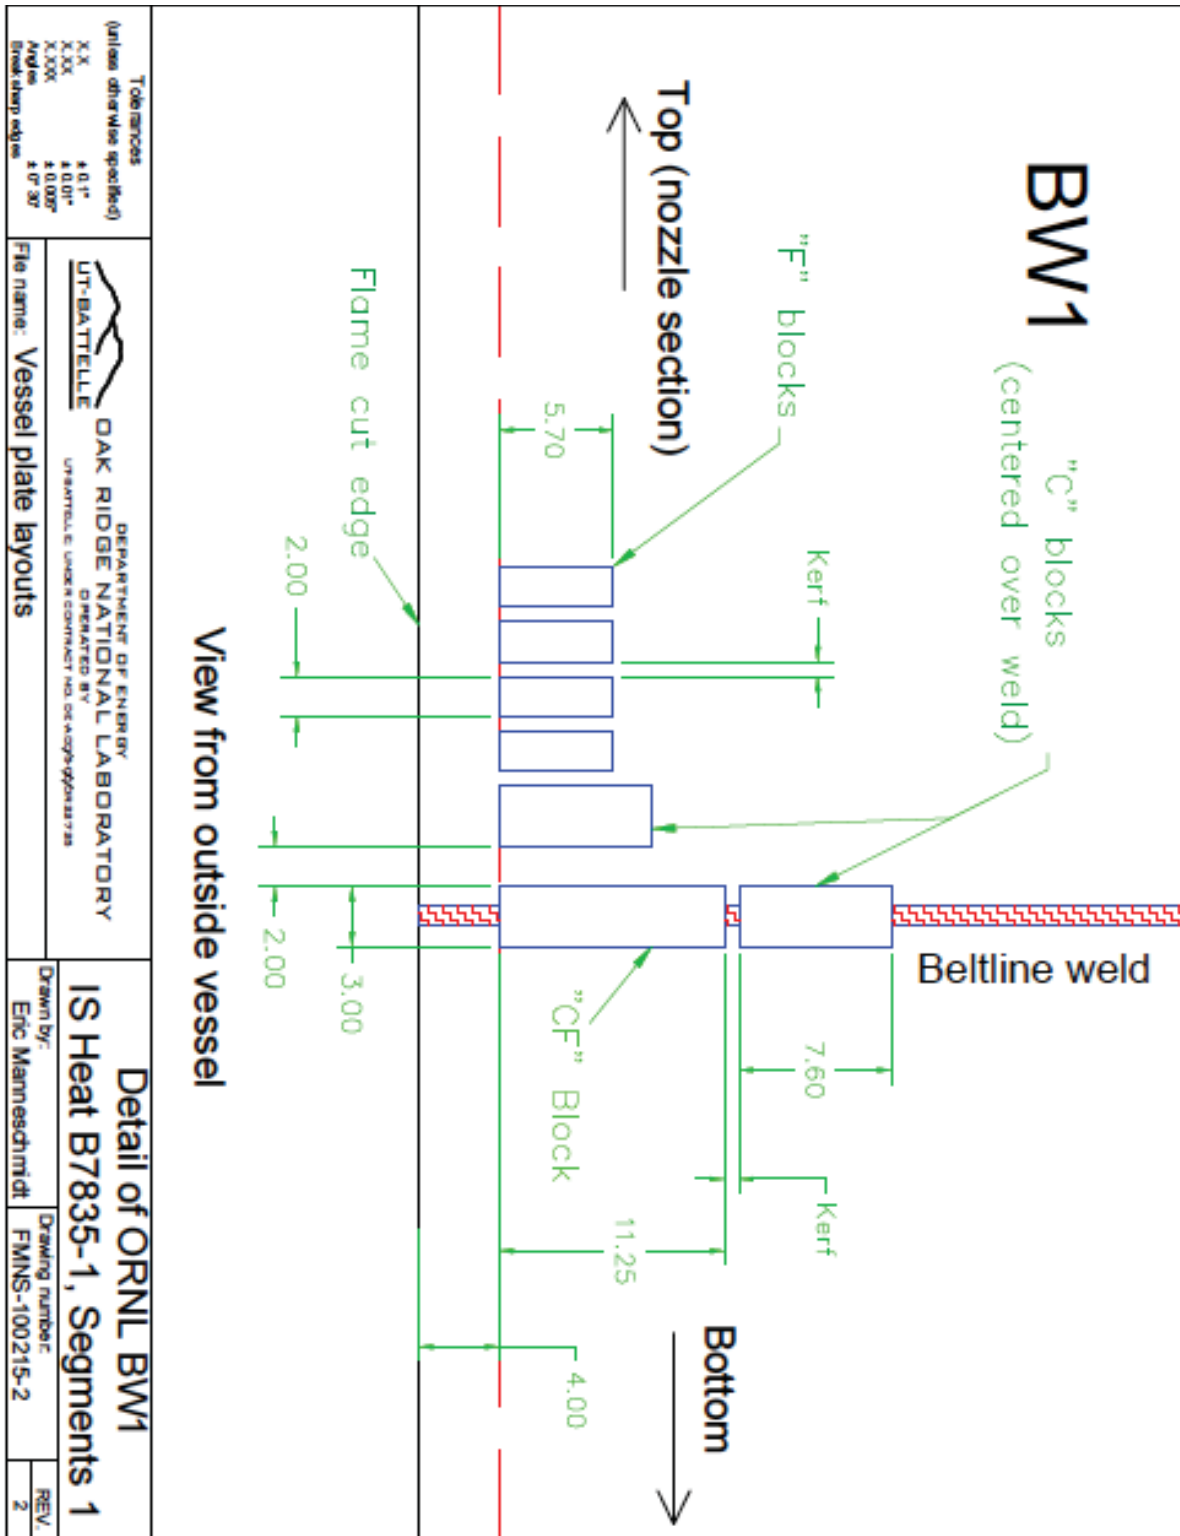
Expanded view of the cutting plan for the Zion Unit 1 ORNL BW1 RPV Segment 1 that contains only the beltline weld and base metal heat B7835-1 (See Figure 4, Figure 5 and Figure 6).
